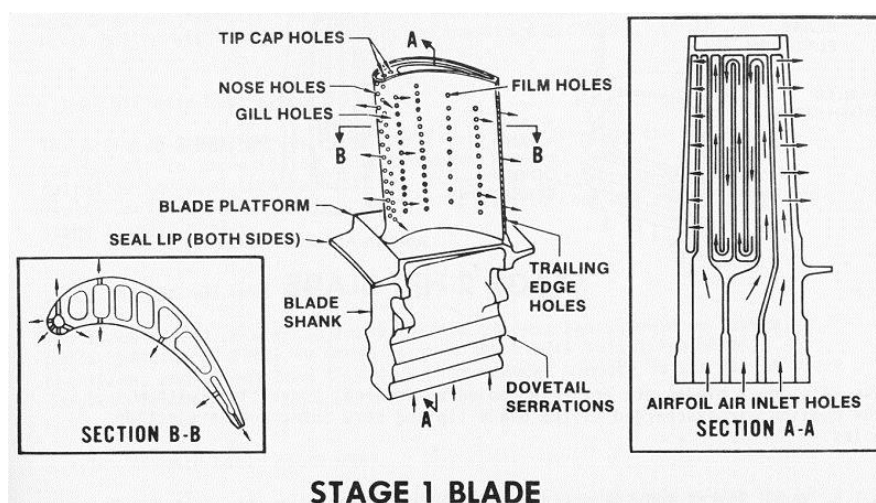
Schematic View of a 1st Rotor Blade Cooling Components – As Example
